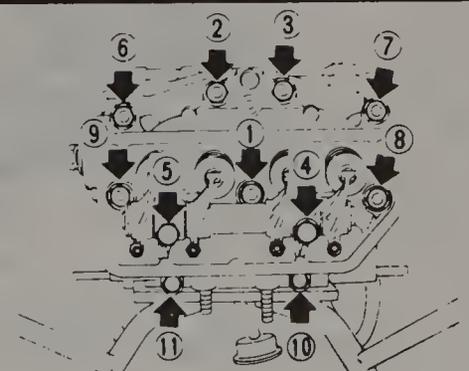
Cylinder head bolt/nut tightening sequence (Sec 17)
